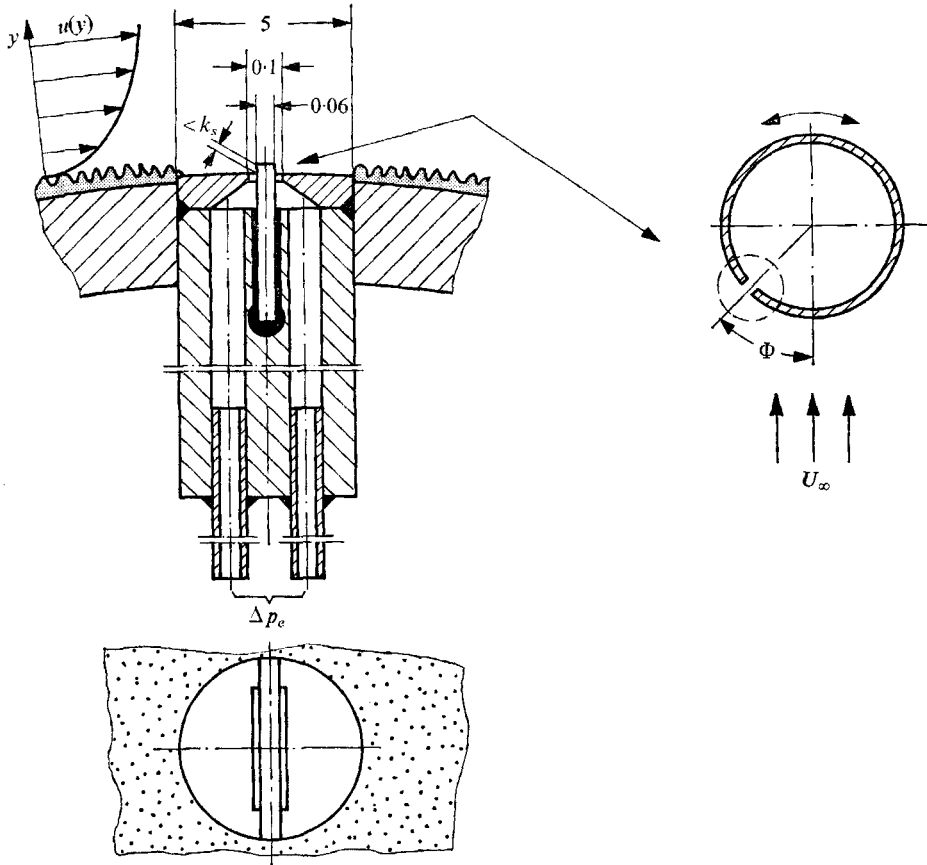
Skin friction probe, detail. Dimensions in millimetres.
